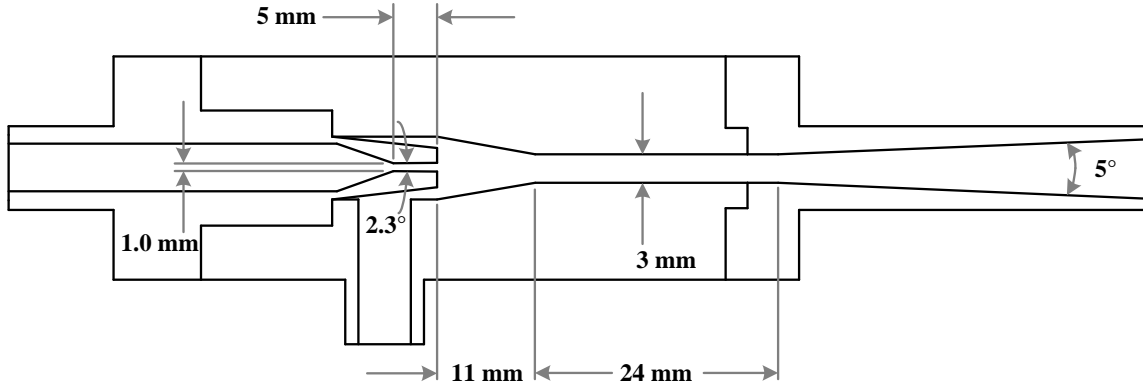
Drawing of R410A ejector with important dimensions specified.
